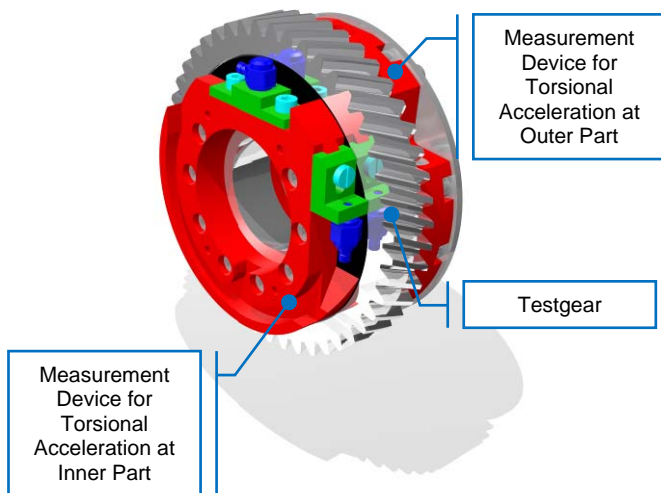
Exemplary assembly of test gear with mounted inner and outer measurement device for torsional acceleration measurement (displayed tooth geometry is only for illustration)
